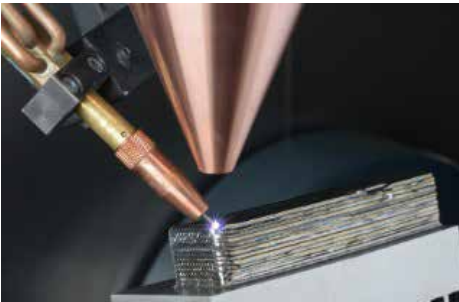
Within the project »TopCladd«, a high-precision optical metrology system is integrated into a welding head to characterise the weld seam of wire-based laser metal deposition inline. (© Fraunhofer IPT)
